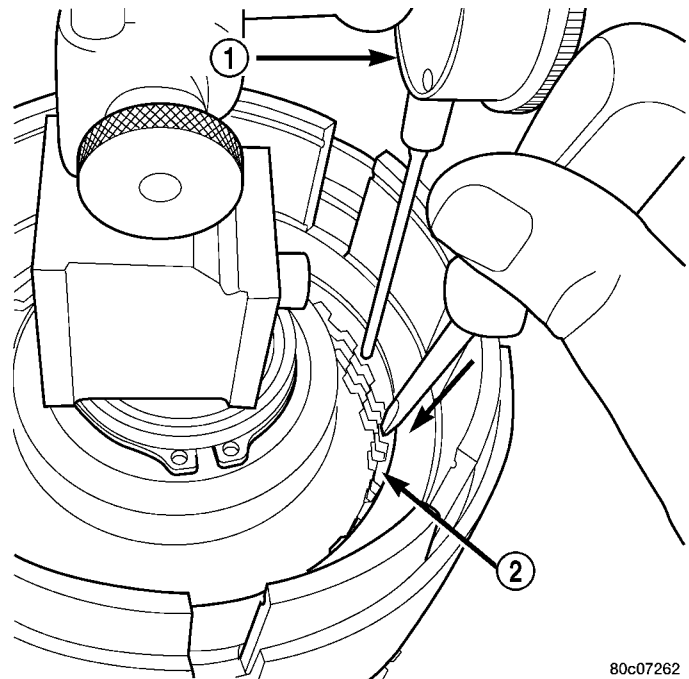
Press Down on UD Clutch Pack and Zero Dial Indicator
